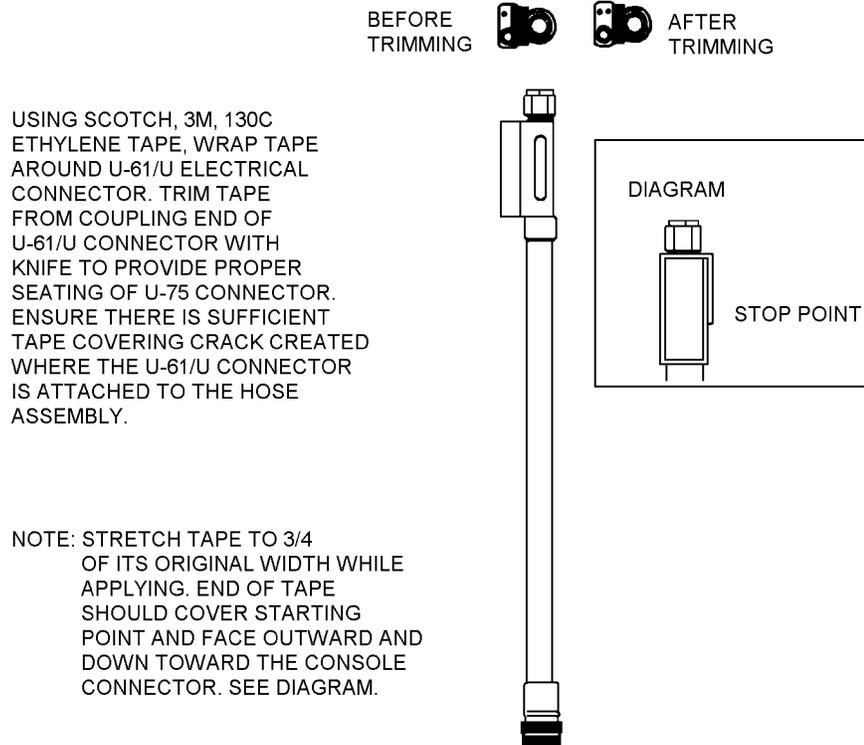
Regulator to Survival Kit Hose Assembly Taping
